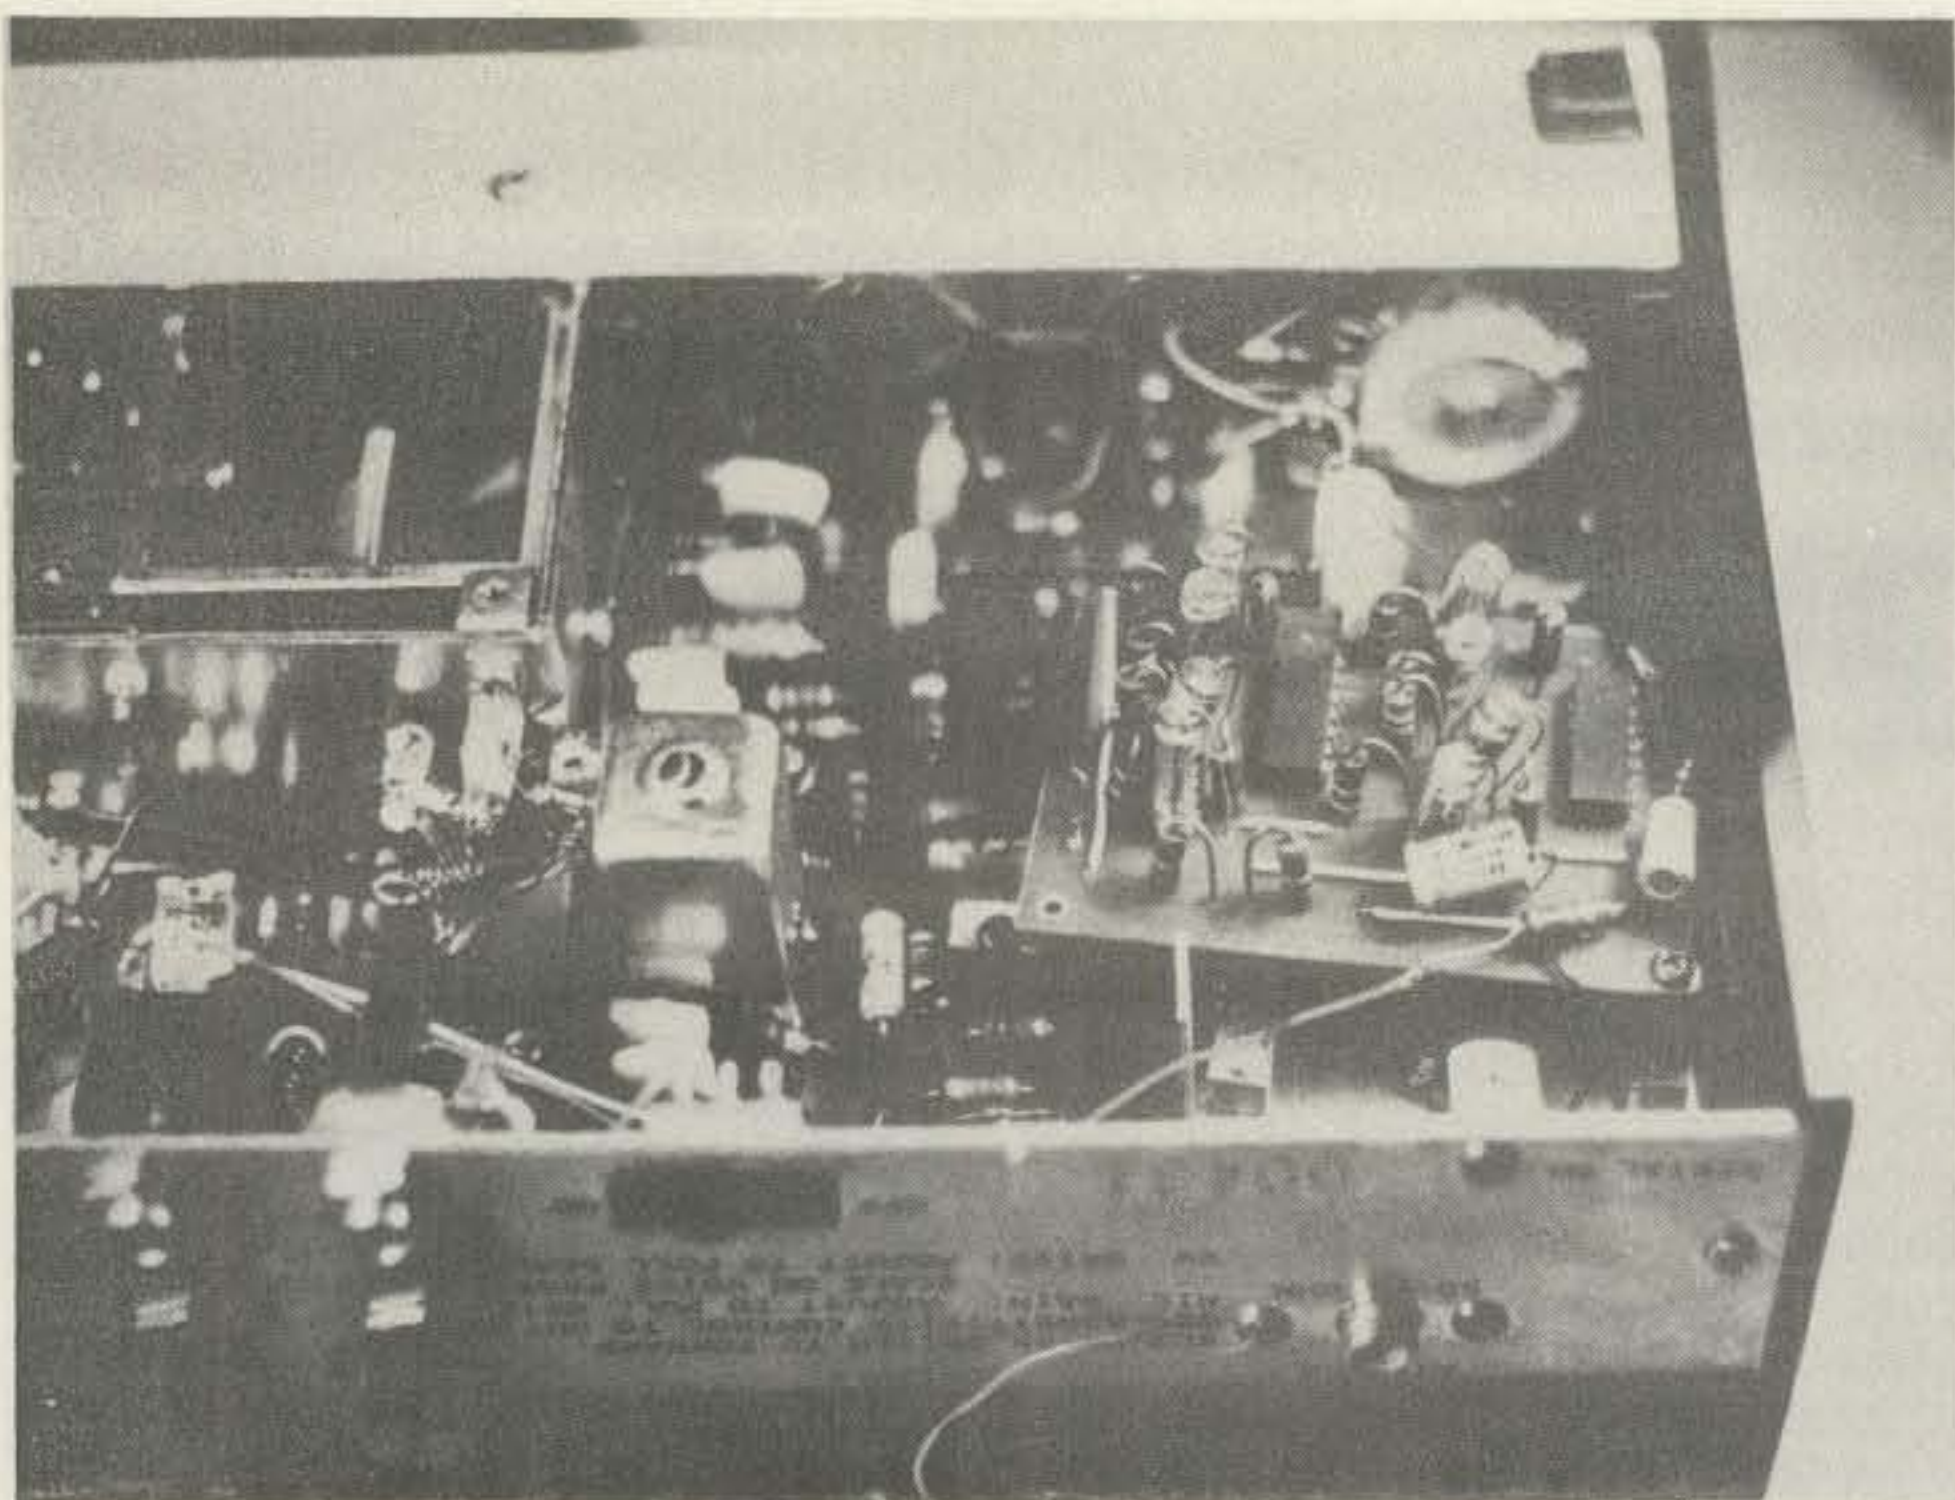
Mechanical details for mounting the CWF-2 board above the audio circuit board of the Argonaut.
